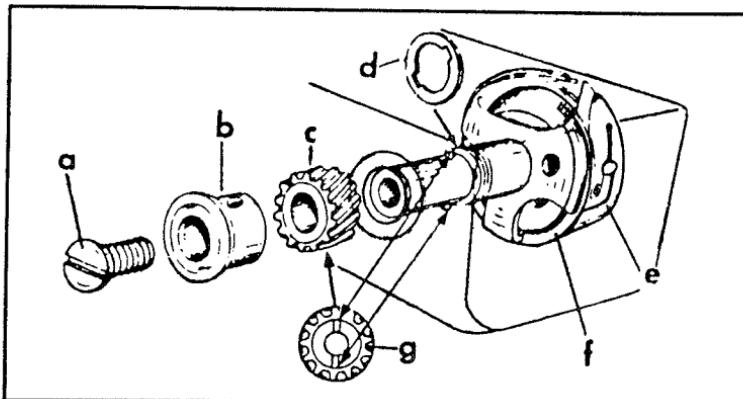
The hook-needle clearance is changed on Models 360 and 362 (but not the 260 and 262) by the installation of thicker or thinner spacers on the short hook shaft. *a*. Set screw; *b*. Hook shaft bushing; *c*. Hook shaft helical gear; *d*. Spacing washer; *e*. Hook thread guard; *f*. Sewing hook; and *g*. Guide bushing.
